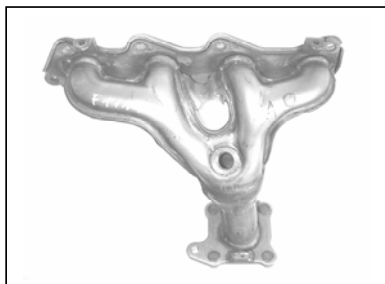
Example of a ferritic stainless steel exhaust Manifold, made of deep drawn clam-shells (Benteler).
